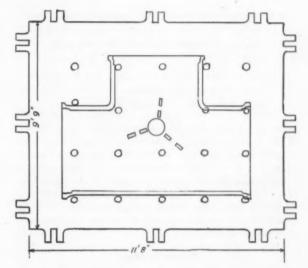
Hold-down plate with tee pipe superimposed to shown positioning in mold. Pipe is part of irrigation pumping system used in Australia.
